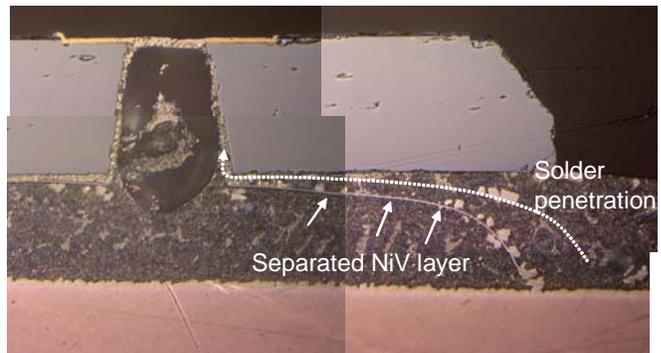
SEM Cross-sections of the failed die revealed solder mixed with backside Au layer underneath the solder metal stack using solder paste die attach.
